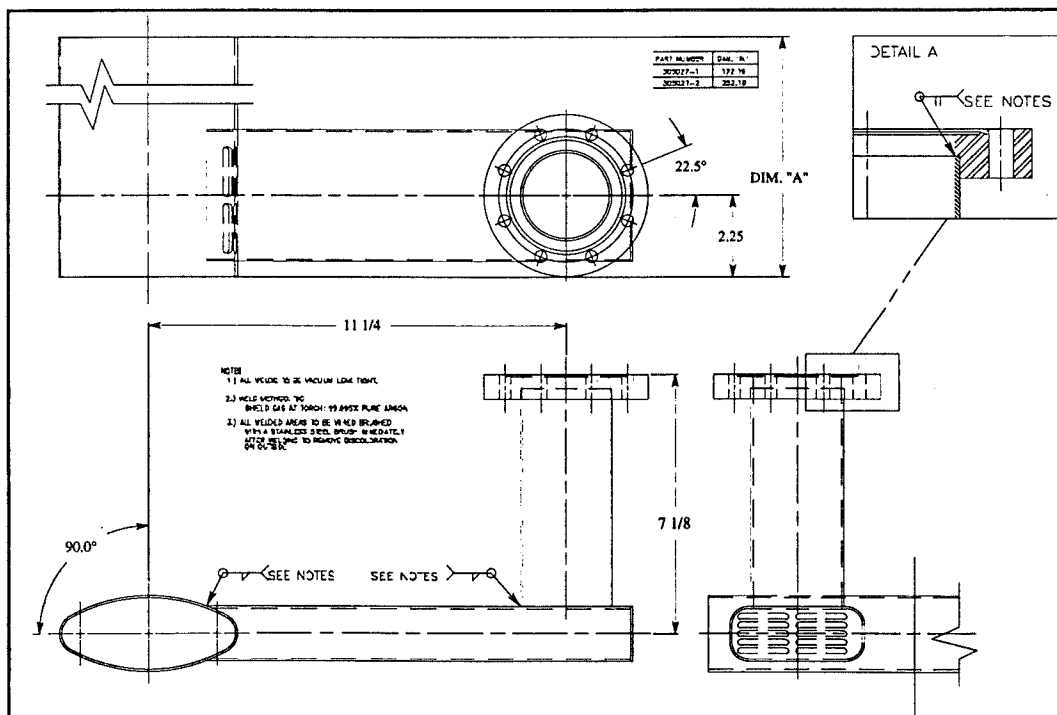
Ion Pump Port/Beam Tube Assembly.
